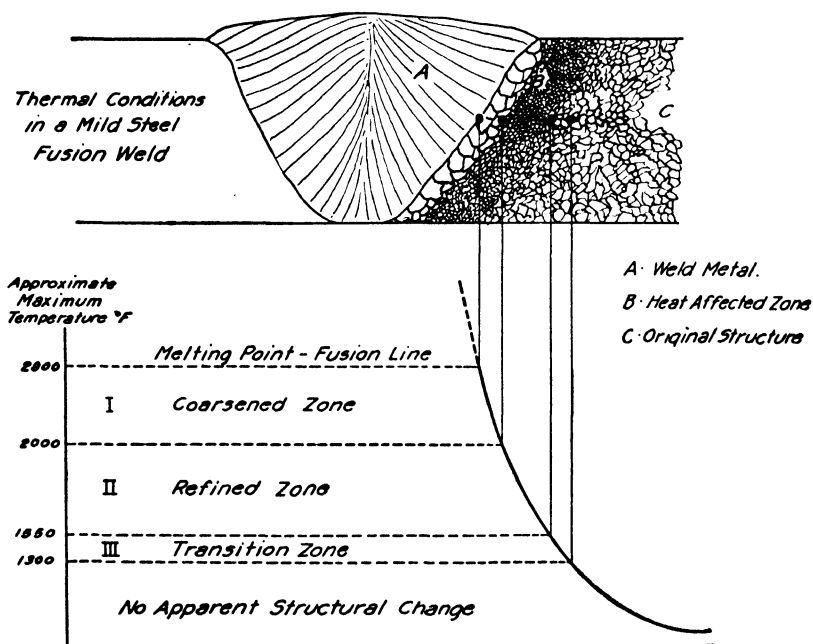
Thermal conditions in a mild-steel fusion weld. (Aborn.^(a))
